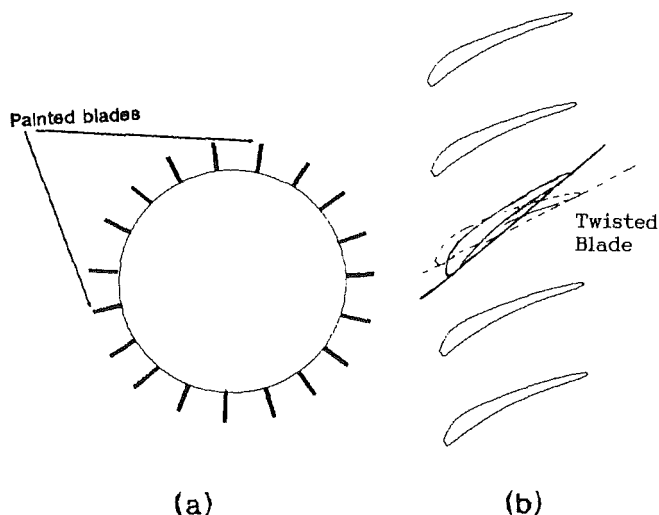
Position of painted blades and schematic of twisted blade of stage 1 rotor
